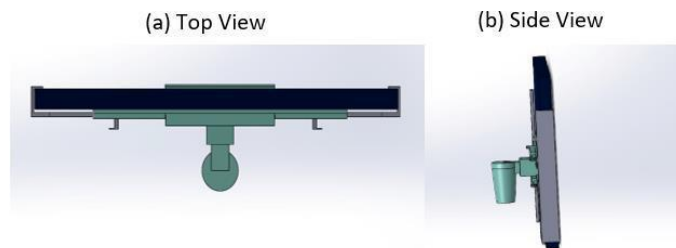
Cassette holder 3D design: (a) Top View and (b) Side View
